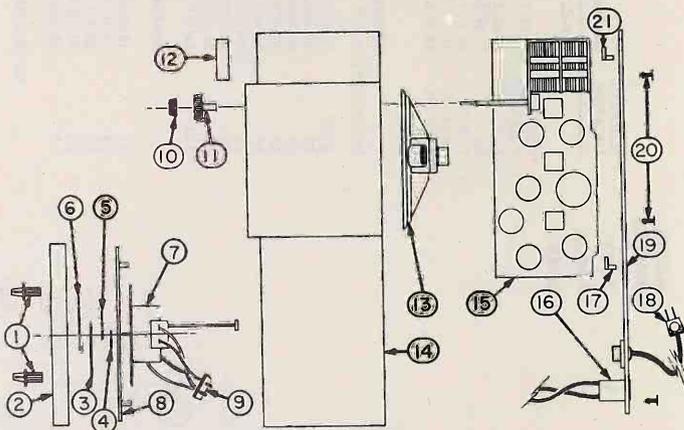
EXPLODED VIEW OF CABINET PARTS
